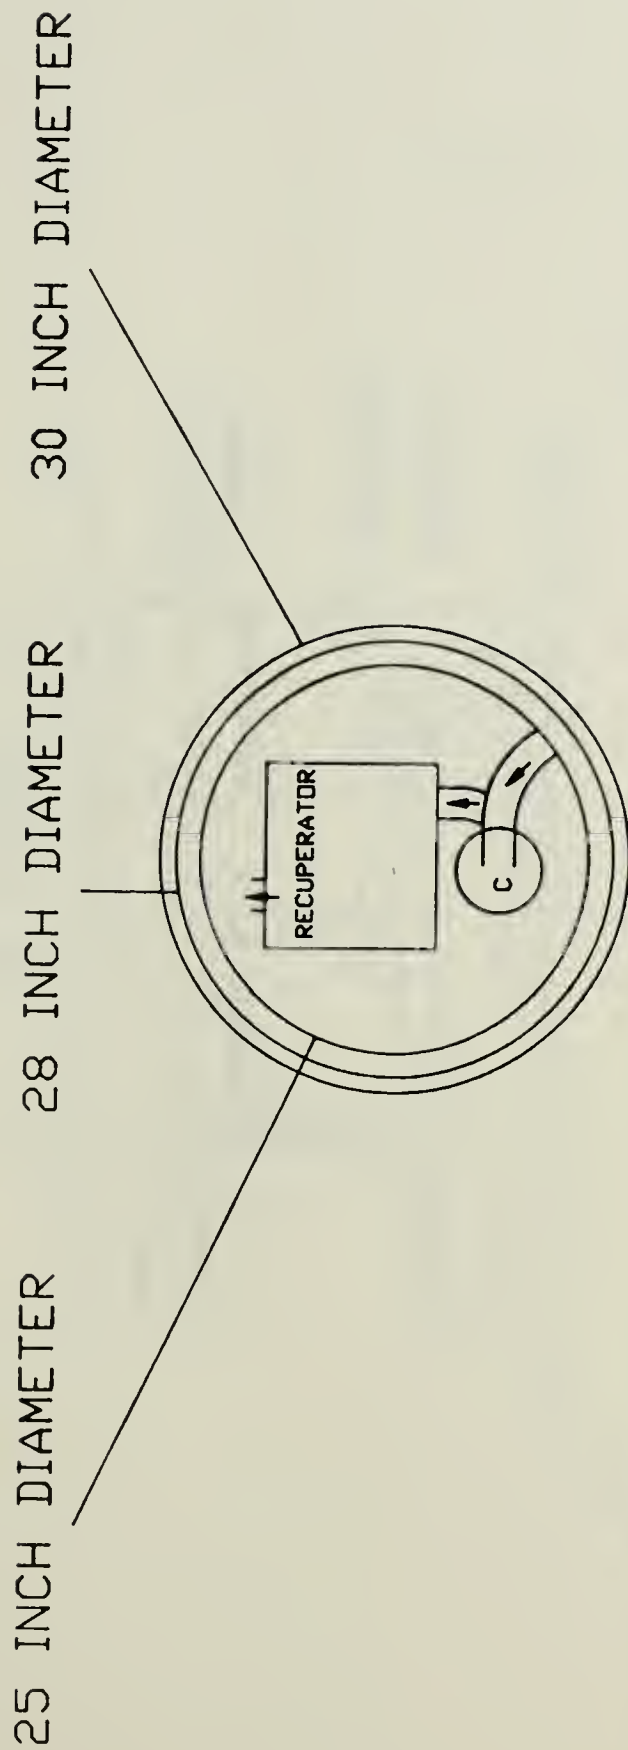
CROSS-SECTIONAL VIEW OF A 30 INCH DIAMETER VEHICLE
